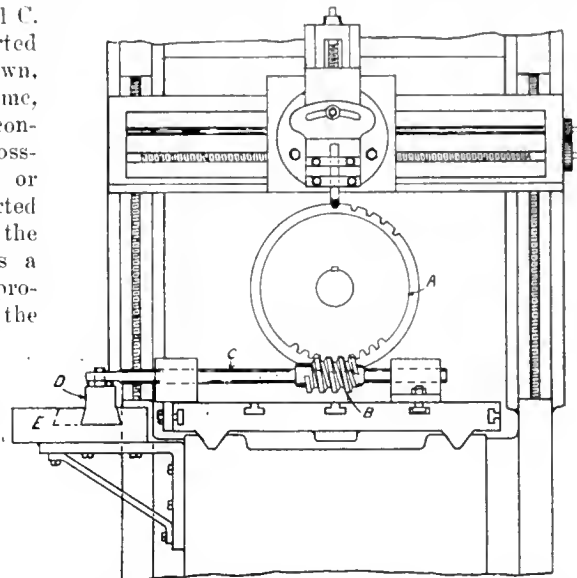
MACHINING SPIRAL GROOVES IN RUBBER RECLAIMING ROLLS
